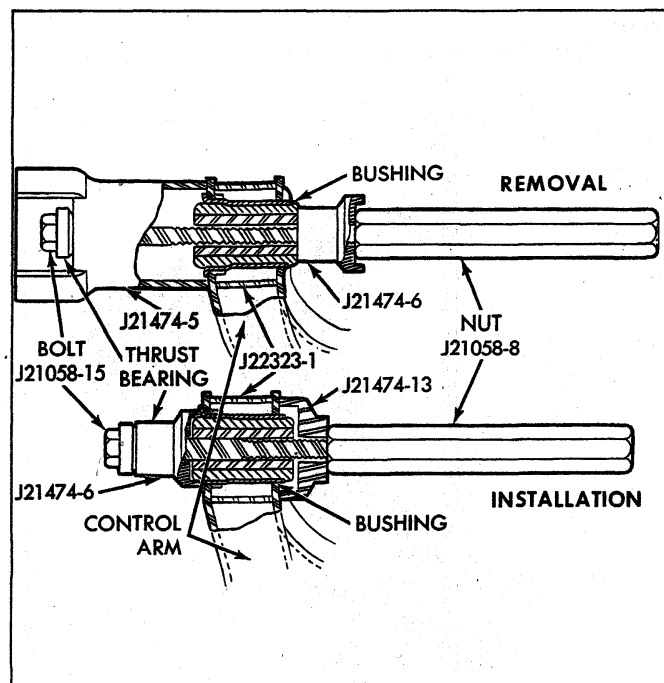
Lower Control Arm Bushing - Small - Chevelle & Camaro
